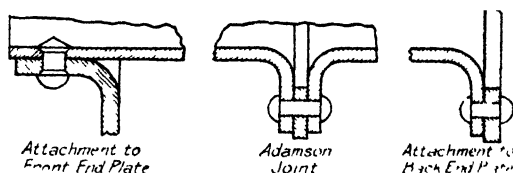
SHOWING JOINTS IN FURNACE TUBES
